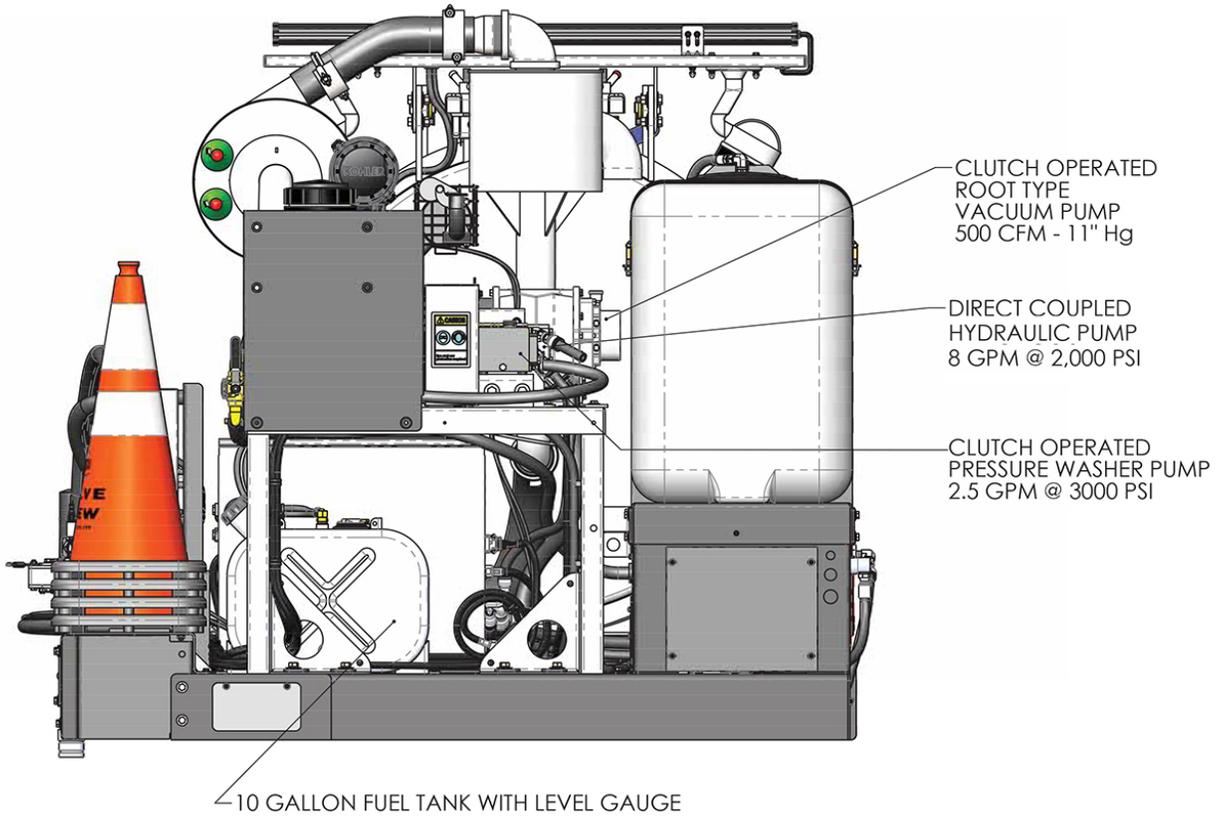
The drawing shows the front view of the Standard LX gas engine configuration, 77-000-55.
